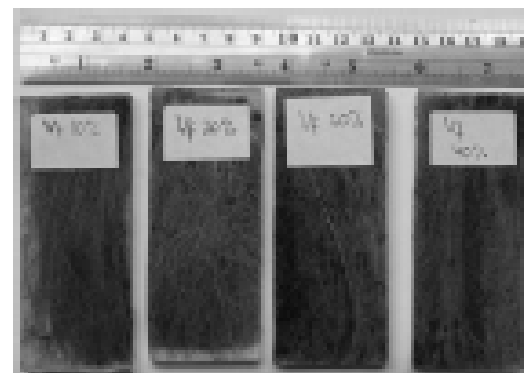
Composite plate panels after being cut into ~100 mm × 40 mm, and further would be cut into three specimens each
